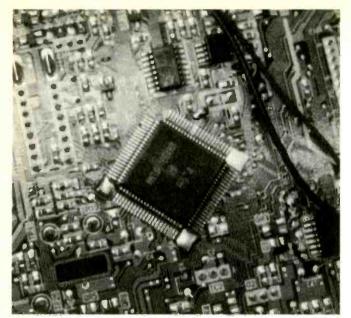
Section of board with a multipin surface-mounted component that was replaced by the author using SolderQuick tape. Very successful, as you can see!
